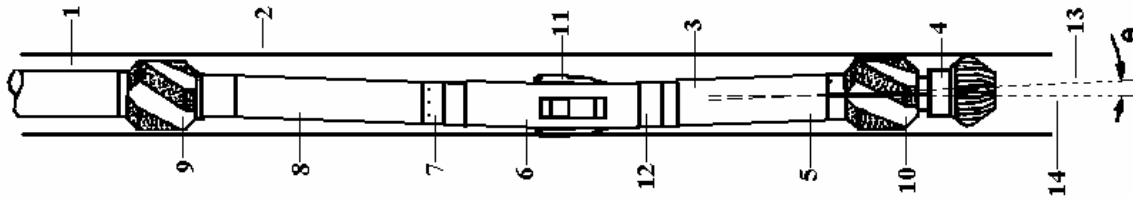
Drilling Assembly: 1 – drill string, 2 – borehole, 3 – bottom hole assembly (BHA), 4 – drill bit, 5 – drilling motor, 6 – trajectory control sub, 7 – bypass sub, 8 – MWD tool included in nonmagnetic collars, 9, 10 – upper and lower stabilizers for centering the drilling assembly in the borehole, 11 – stabilizer blades, 12 – induced bend to provide angular offset (θ) between the axis of the drill bit (13) and the center line (14).
